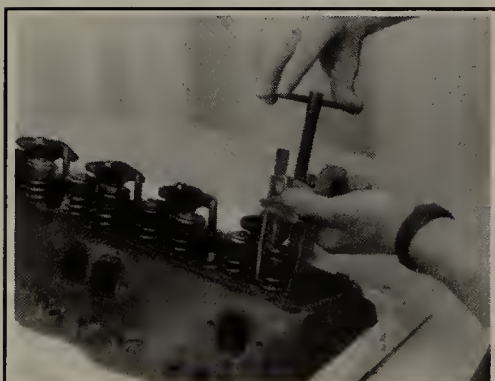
When removing an OHV valve spring, use a compressor tool to relieve the tension from the retainer
